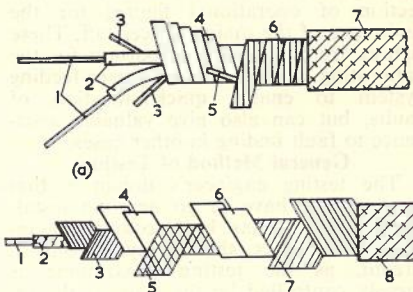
Sketch of Component Parts of the CF and HF cables Used on the Installation of Equipment.
